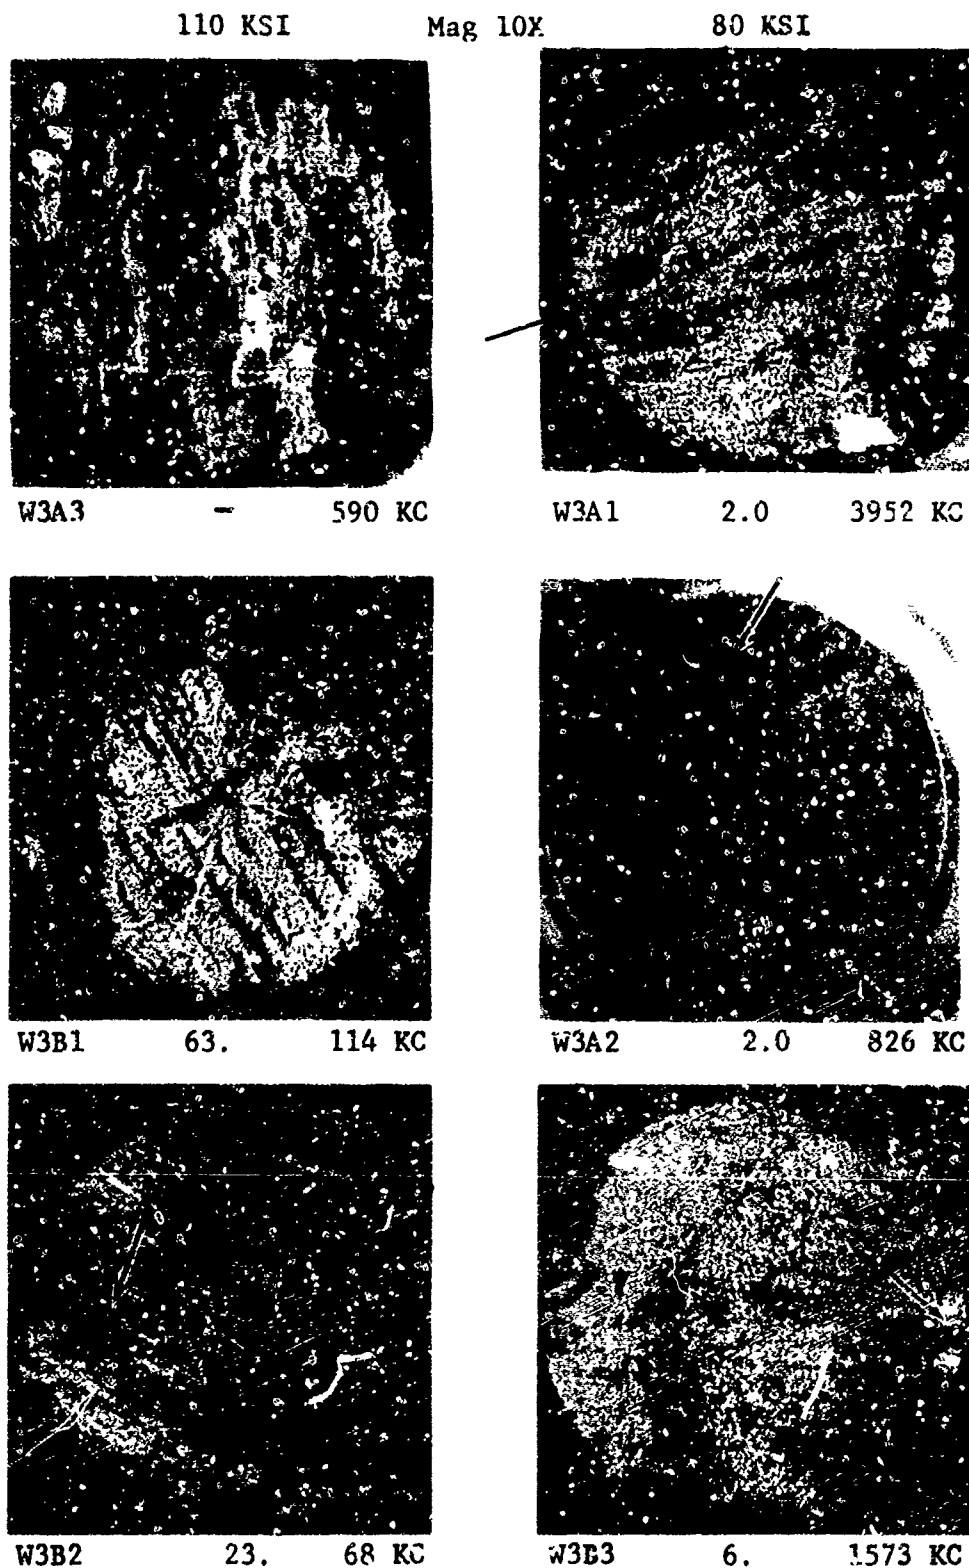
Fracture Surfaces of Failed Fatigue Specimens Series W3-
